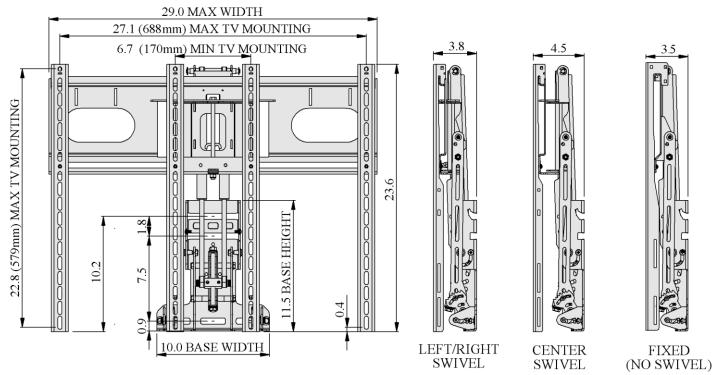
, Mount Overall Size without Frame, Television Mounting Hole Pattern Range, Wall Mounting Hole Pattern Range Note: Mount Only Comes with 2 television Mounting Arms, Not the 4 Shown
